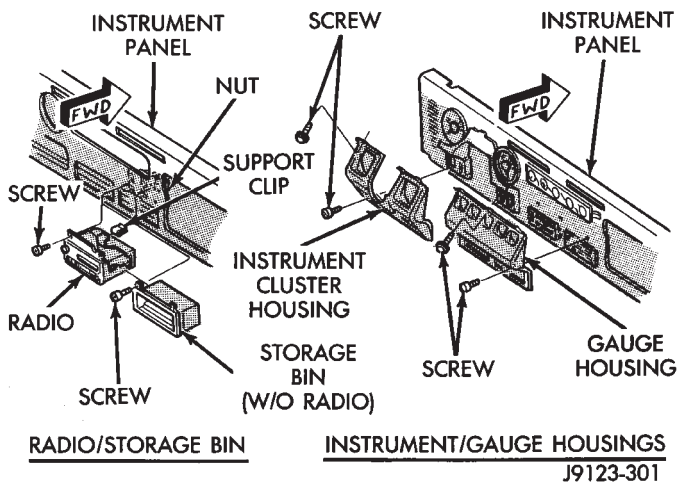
Instrument Cluster/Gauge Housing and Radio
